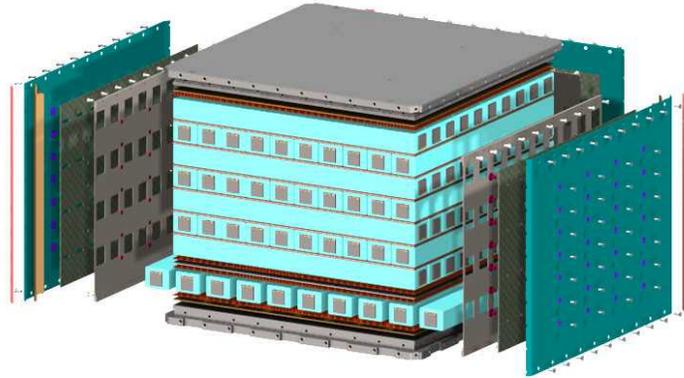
exploded view of the GLAST Beam Test 99 Calorimeter.
